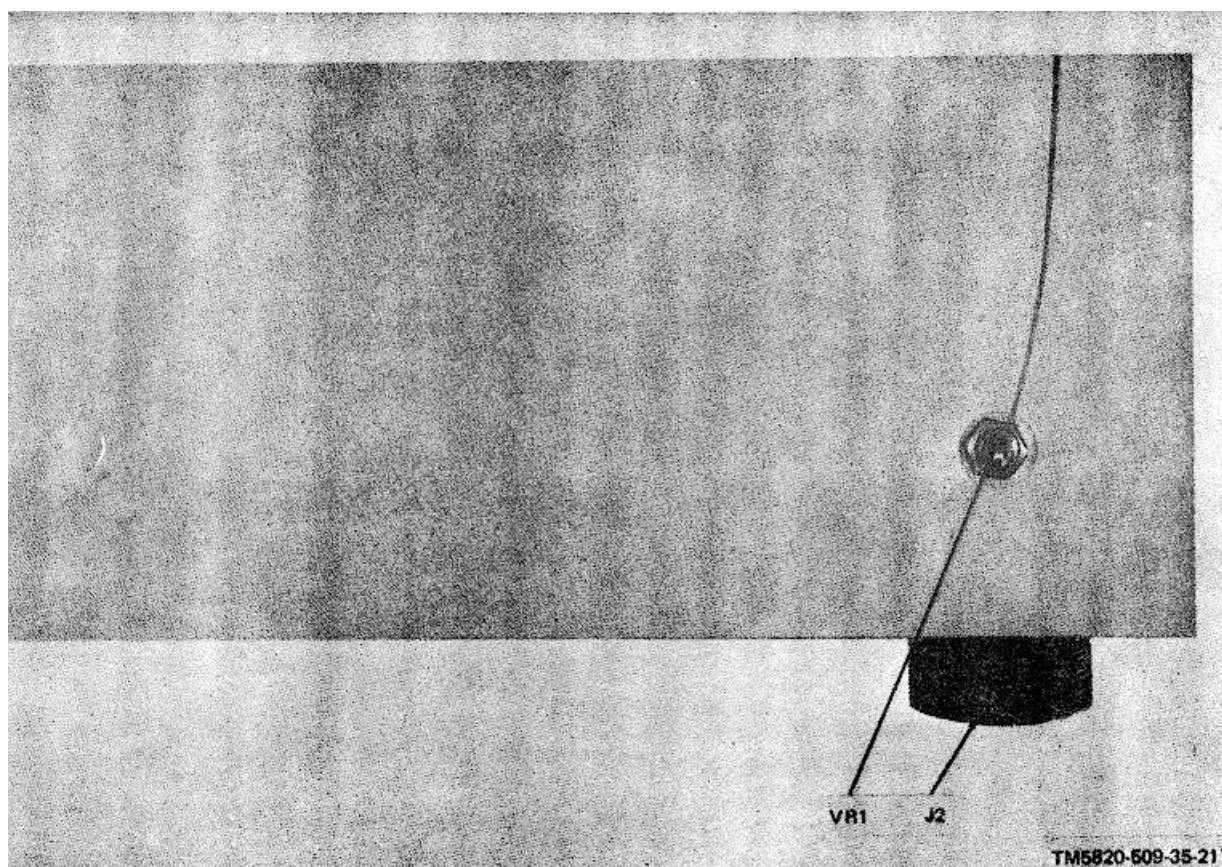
Test Fixture for Audio Frequency Amplifier AM-3506/PRC-47, Chassis Parts and Connector Location.
